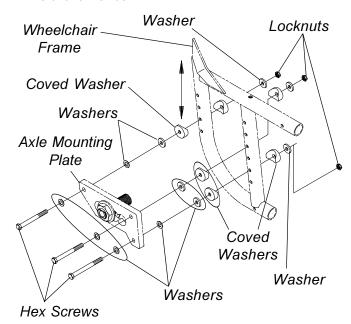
ADJUSTING REAR SEAT HEIGHT
